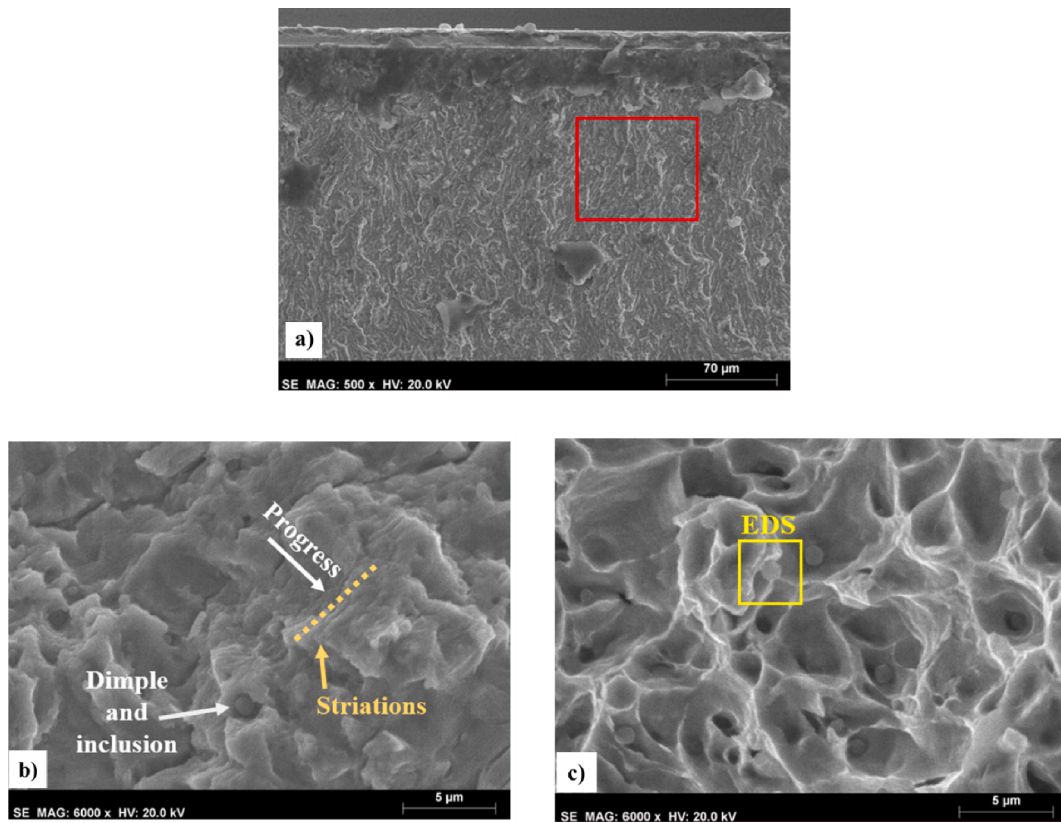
SEM observations of HSLA steel fracture surfaces of a) 10Lc specimen showing crack nucleation b) 10Lc specimen showing striations and c) 10Lb specimen showing ductile fracture (dimples and inclusions).
